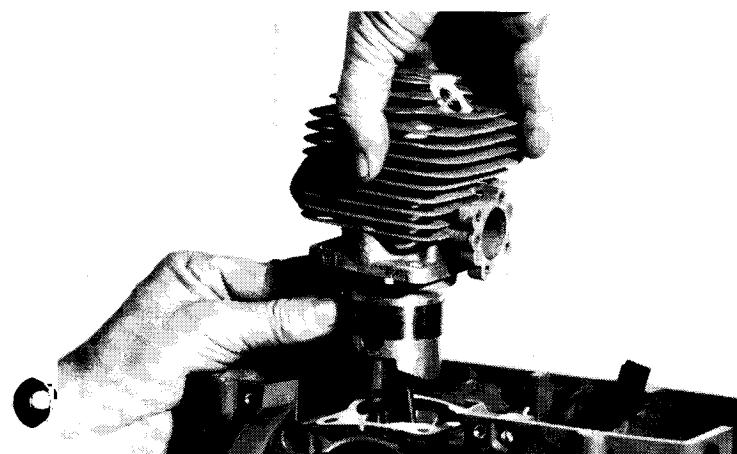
Use piston ring tool no. 9191 when fitting the cylinder. If a new piston or cylinder are to be used, make sure that the new part has the correct classification.
